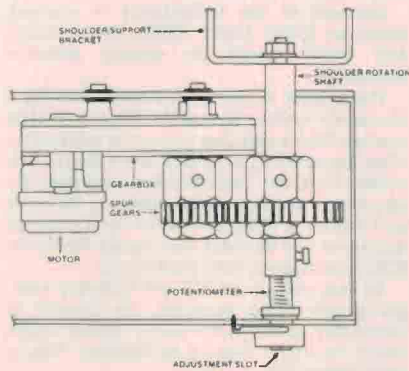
Simplified view of the rotation drive assembly. Note that the gearbox drive shaft comes out on the same side as the motor, unlike the shoulder and elbow drives.
